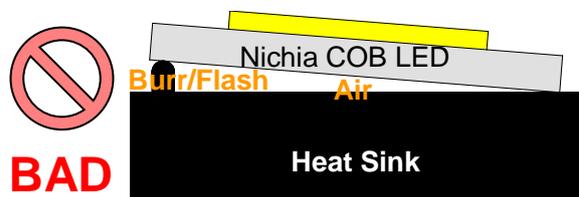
Heat Sinks with Burrs/Flashes on the Contact Surface
